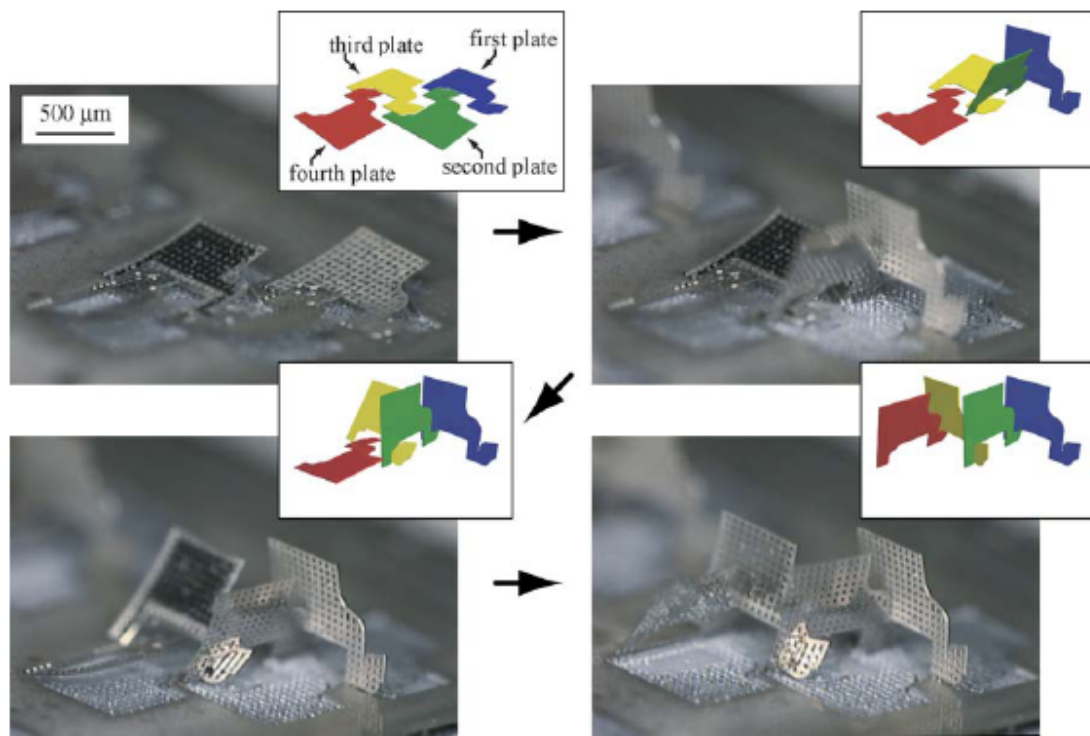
Step-by-step photographs of the four-step sequential assembly [12].
